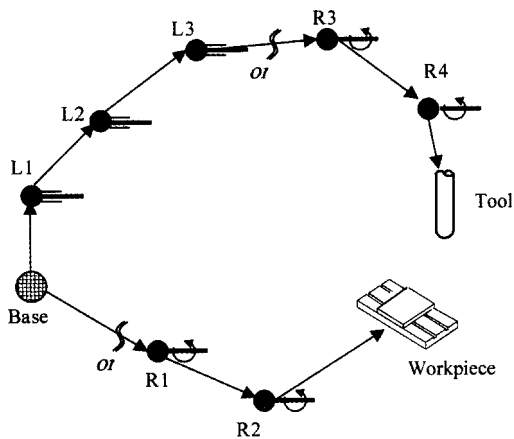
Example kinematic configuration of 5-axis machine tools.
